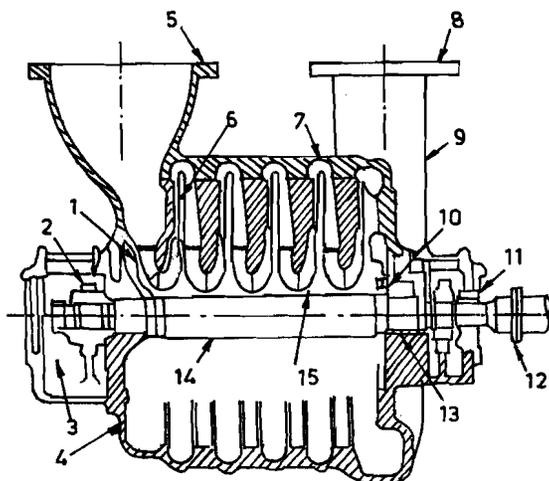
Sectional Drawing of a Typical Five-stage, Uncooled, Horizontally Split Centrifugal Compressor 1) Guide Vane 2) Thrust Bearing 3) Bearing Housing 4) Casing 5) Inlet Flange 6) Diaphragm 7) Diffuser 8) Discharge Flange 9) Volute 10) Thrust Balancing Drum 11) Shaft Bearing 12) Coupling 13) Seal 14) Shaft 15) Impeller
